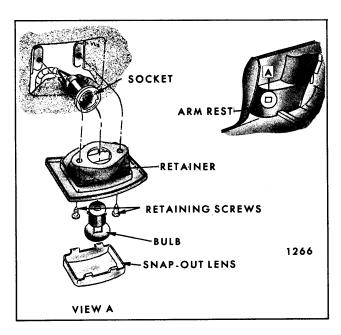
Rear Quarter Arm Rest Courtesy Lamp Assembly
